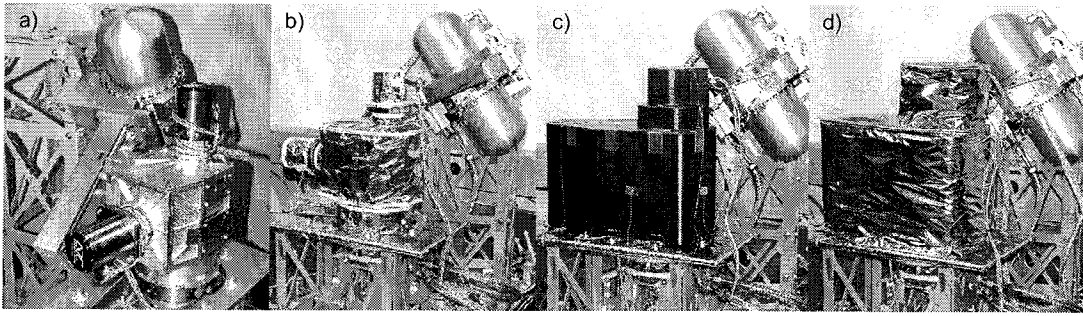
Focal Plane Optical Mechanical Assembly (FPOMA) construction details: a) bare FPOMA, b) with added inner MLI, c) with 230K shield added, and d) complete with outer MLI.
